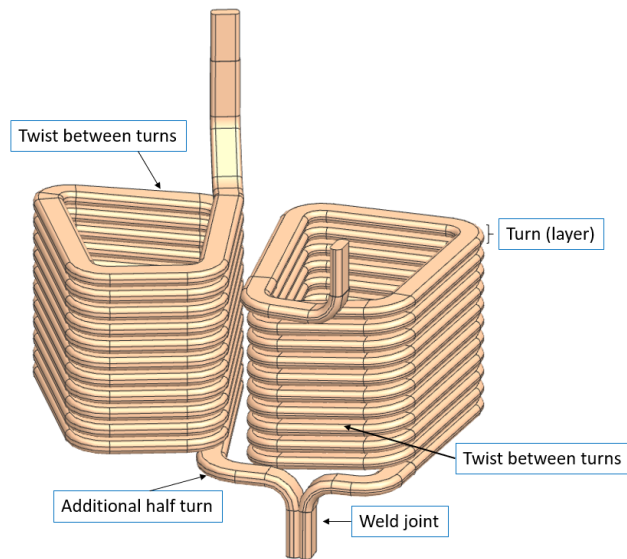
Two adjacent coils with a weld joint.
